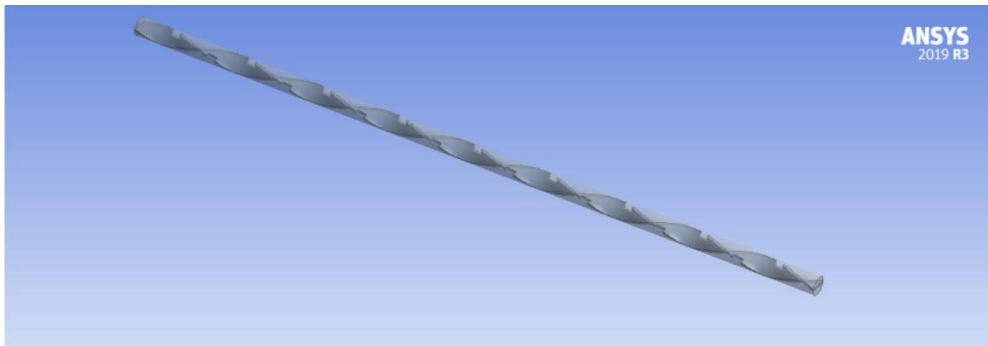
Geometric model of the plain tube with secondary insert placed inside it.
